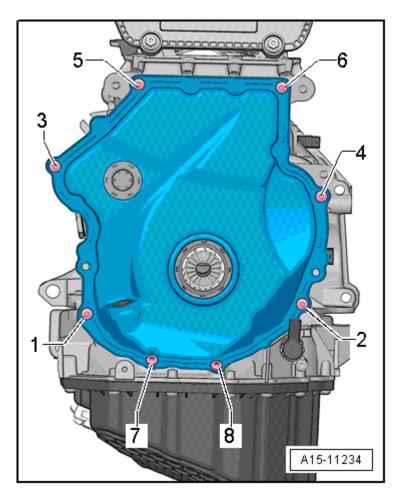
Identifying Timing Chain Guard Lower Section - Tightening Sequence for 8 Bolts
